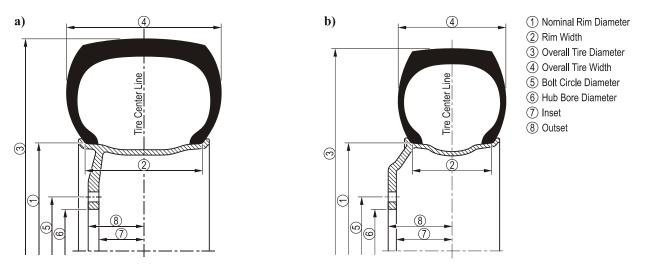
Cross-sections of the crane wheel and tire: a) front wheel, b) rear wheel. Dimensions are provided in Table 4.19 through Table 4.22
